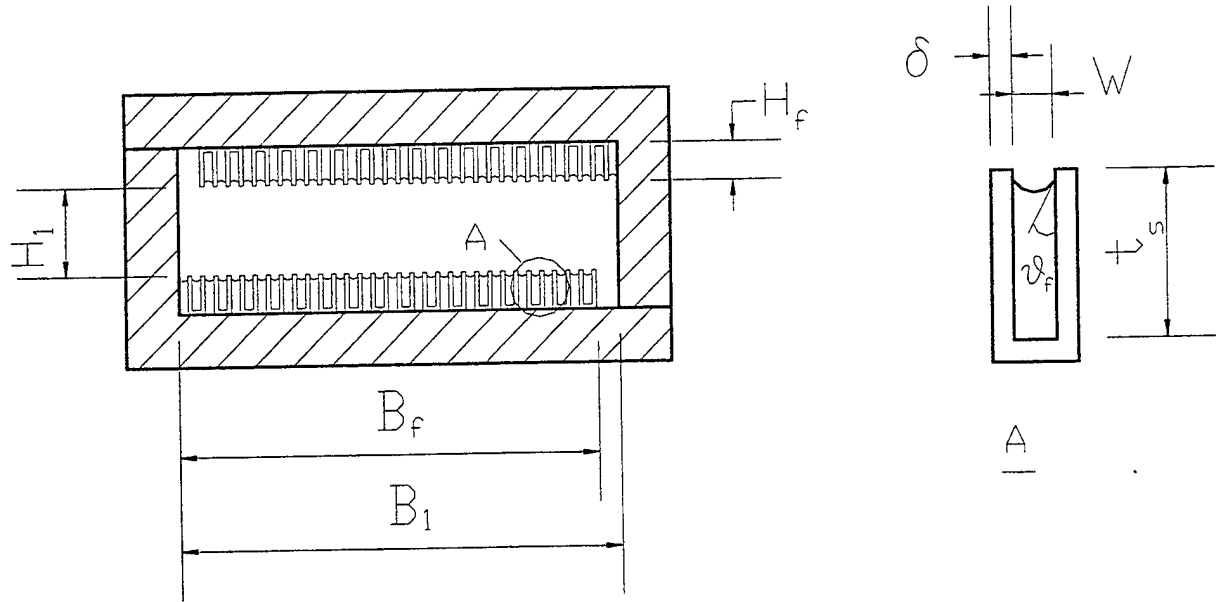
Cross-sectional view of a heat pipe with capillary fins.
